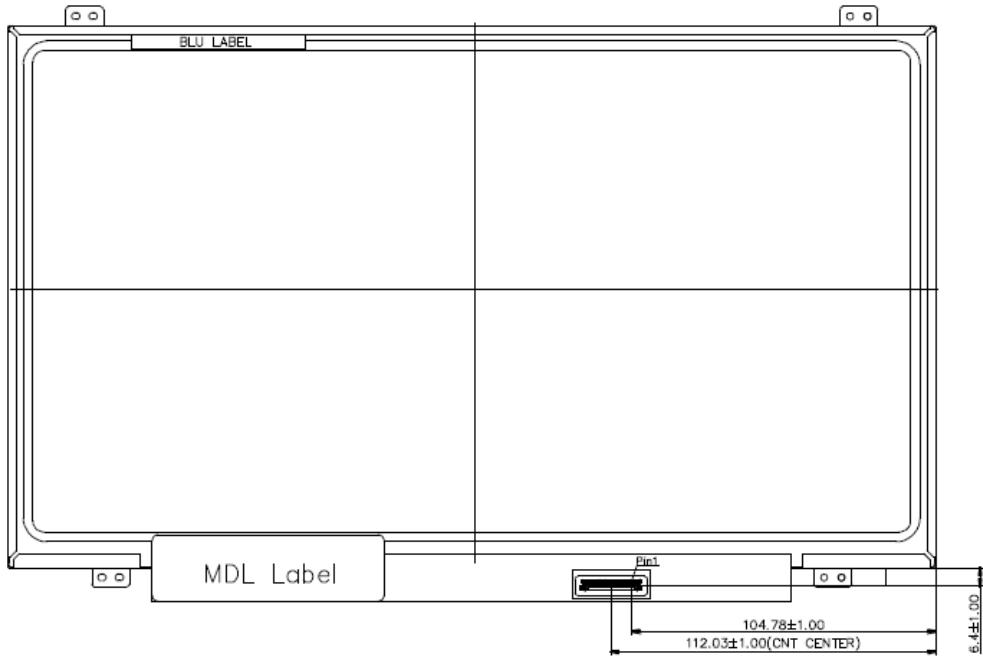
TFT-LCD Module Outline Dimensions (Rear view)
